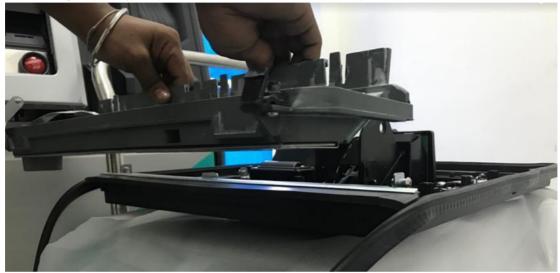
Placing the PPU panel (top) onto the G6-300 panel assembly (bottom)
